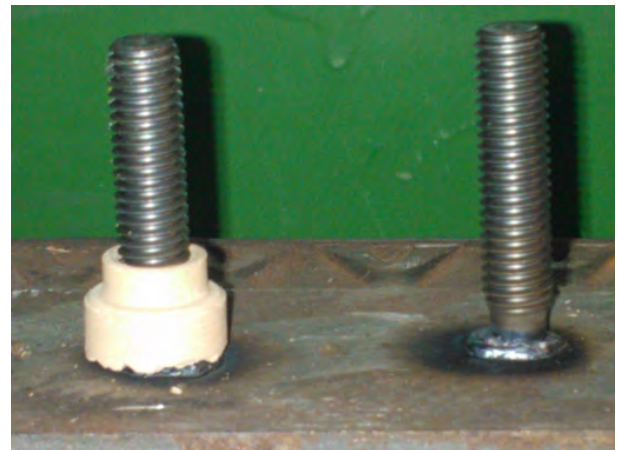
Results of connecting a small element to sizeable surface with and without using ceramic ring for weld forming.
